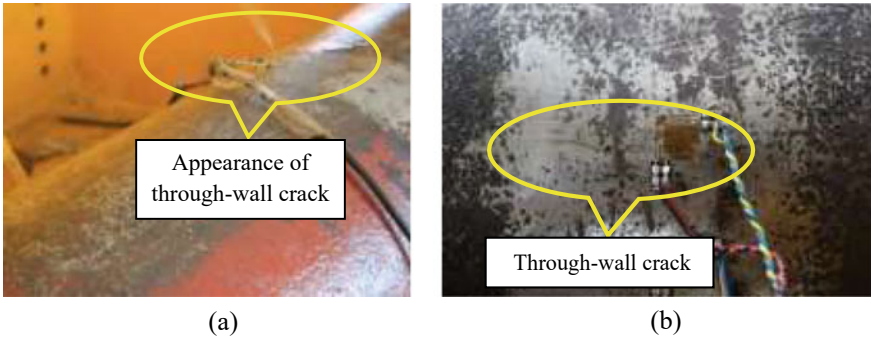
Close-up views of failure of pipe specimen with longitudinal seam crack
